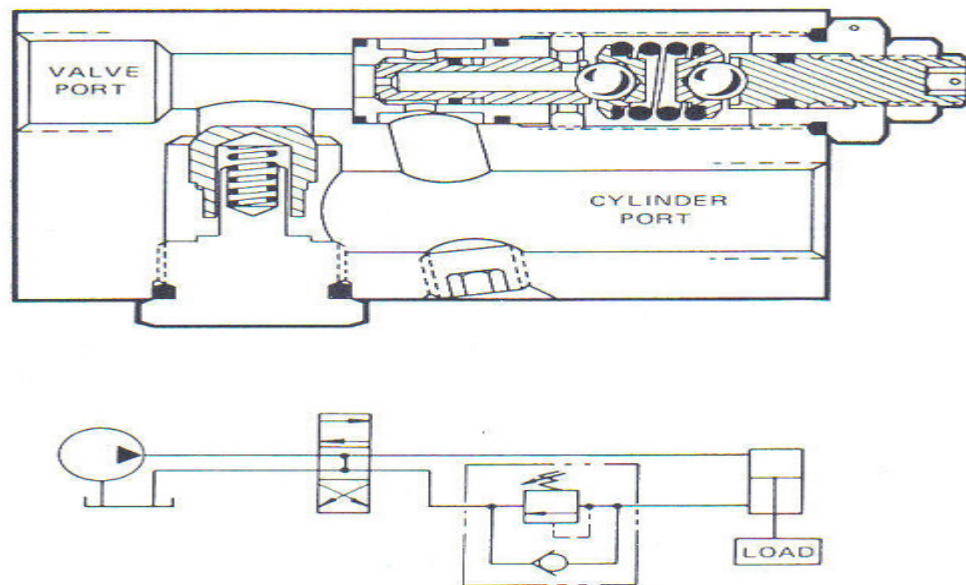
Counterbalance valve can lock and position heavy loads in the up position and prevent drifting. [61]
